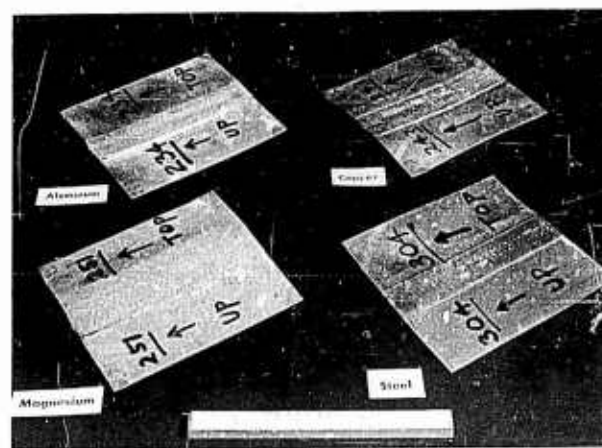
Explosively seam welded, lap joints in four base metals
